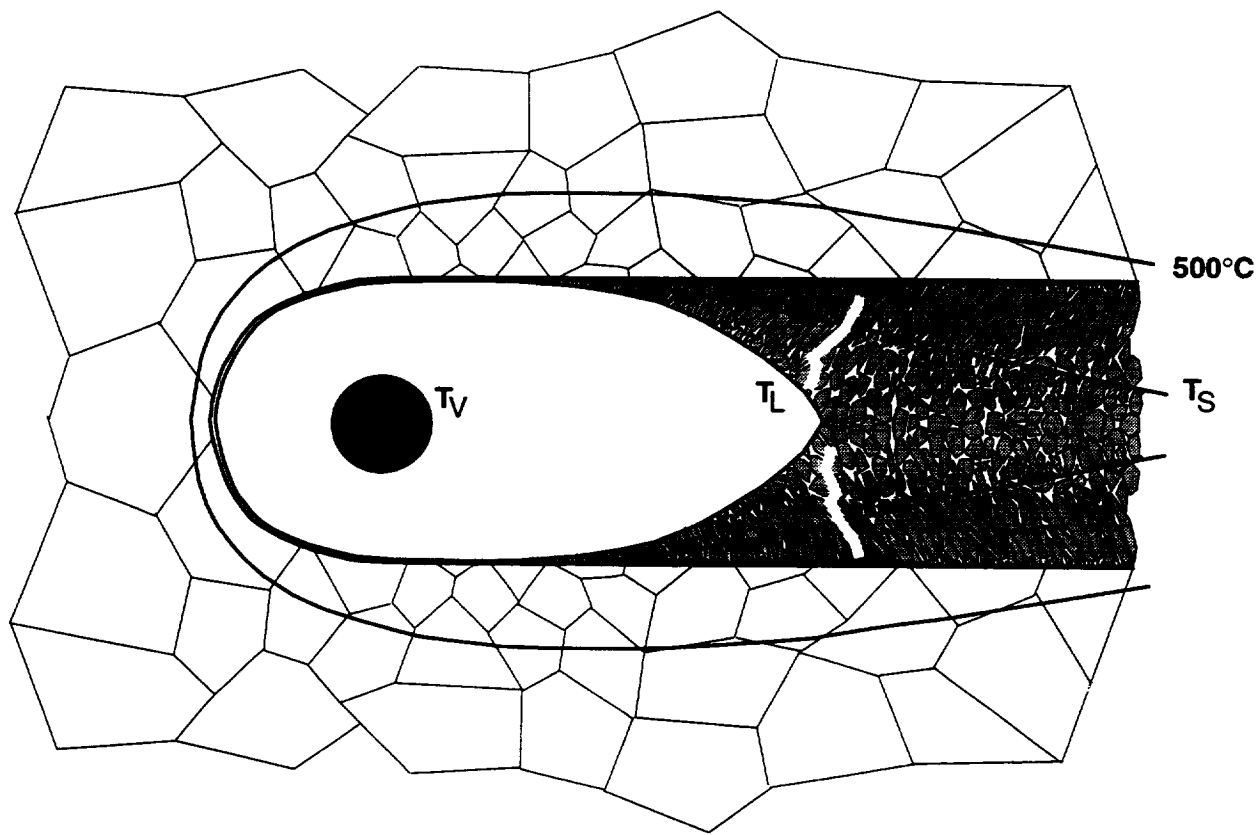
Composite Schematic of Solidification Cracking of 2195 During Laser Beam Welding.
